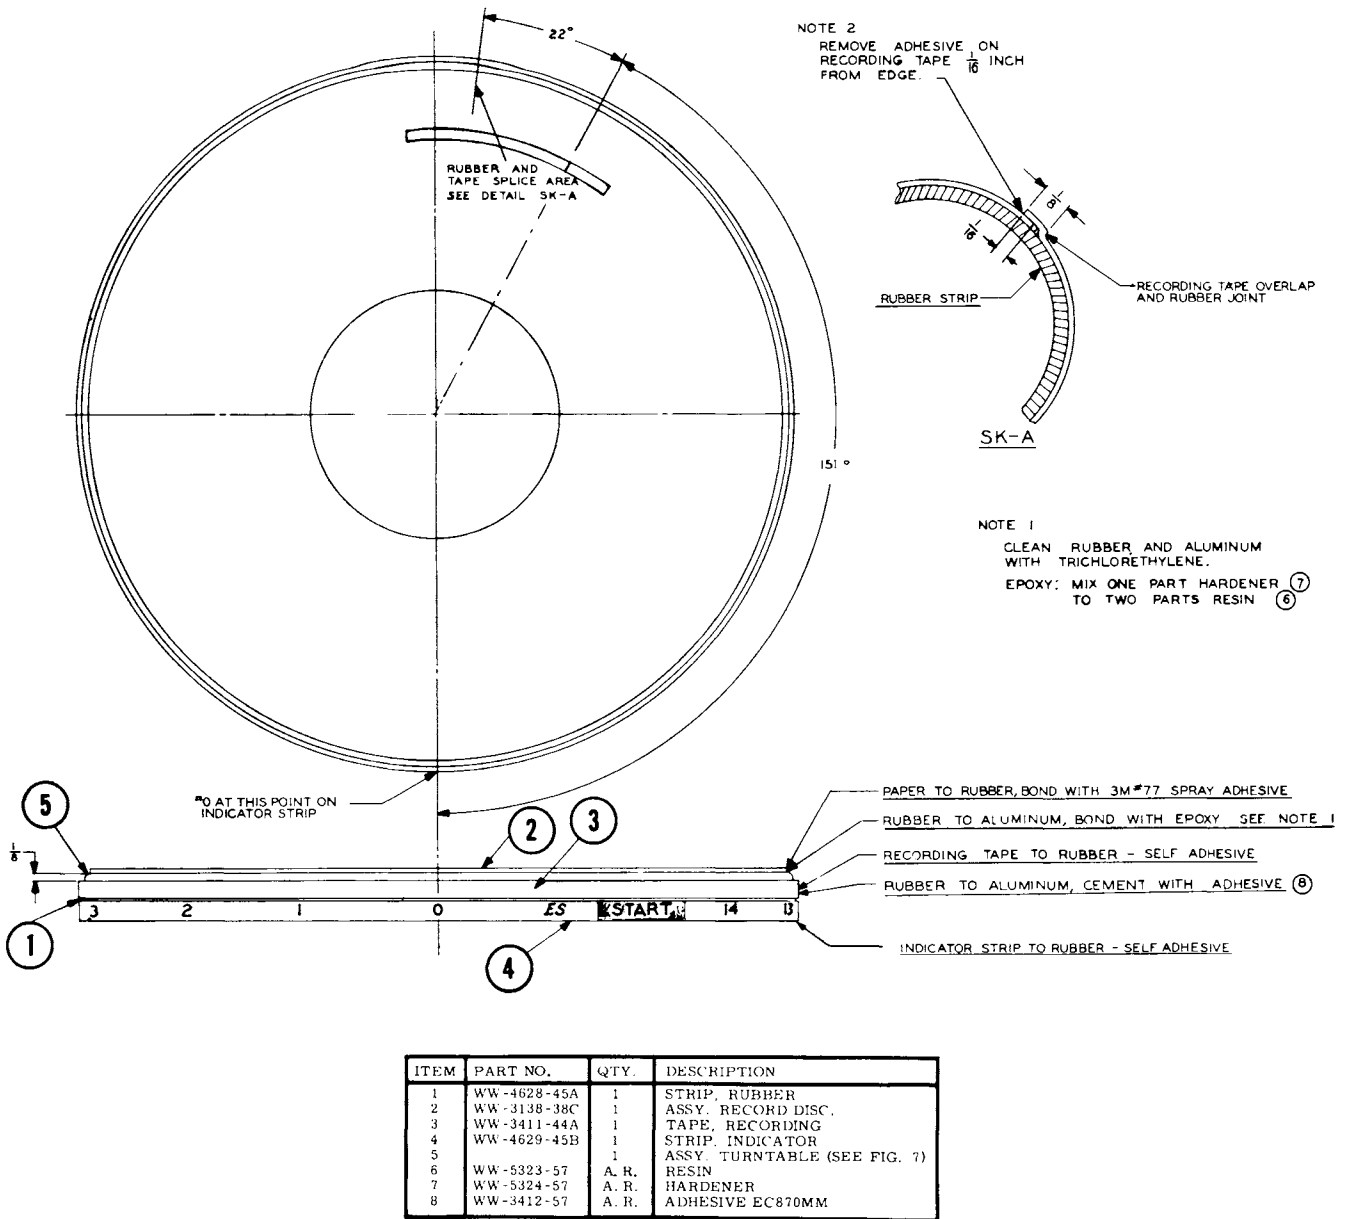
Assembly, Tape Binding for SP-2, WW-4630-1C (Part of Assembly, Figure 5).
